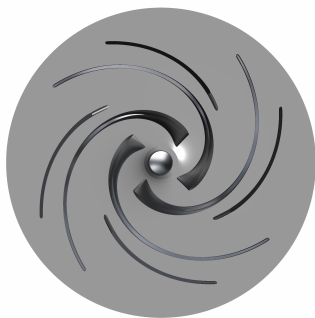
Top view of the ORCHID pump impeller (shroud removed).
